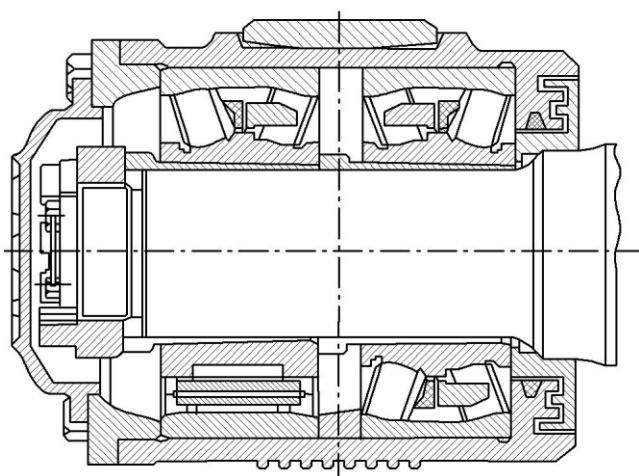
An axle box with spherical and cylindrical bearings produced in 1952-1953.
